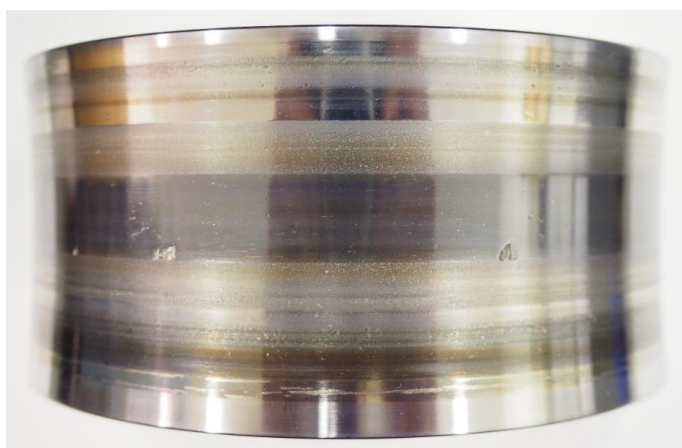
The scattered pitting on the inner ring of the toroidal bearing after the test.
